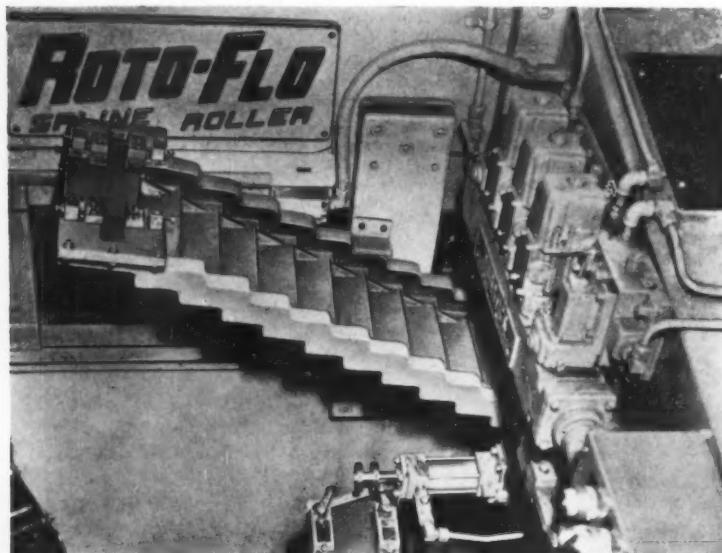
Typical application of new device that delivers unthreaded shafts to Roto-Flo machine in baskets on a roller conveyor
